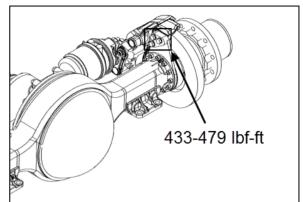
CALIPER CARRIER MOUNTING BOLTS -MERITOR DRIVE AXLE
